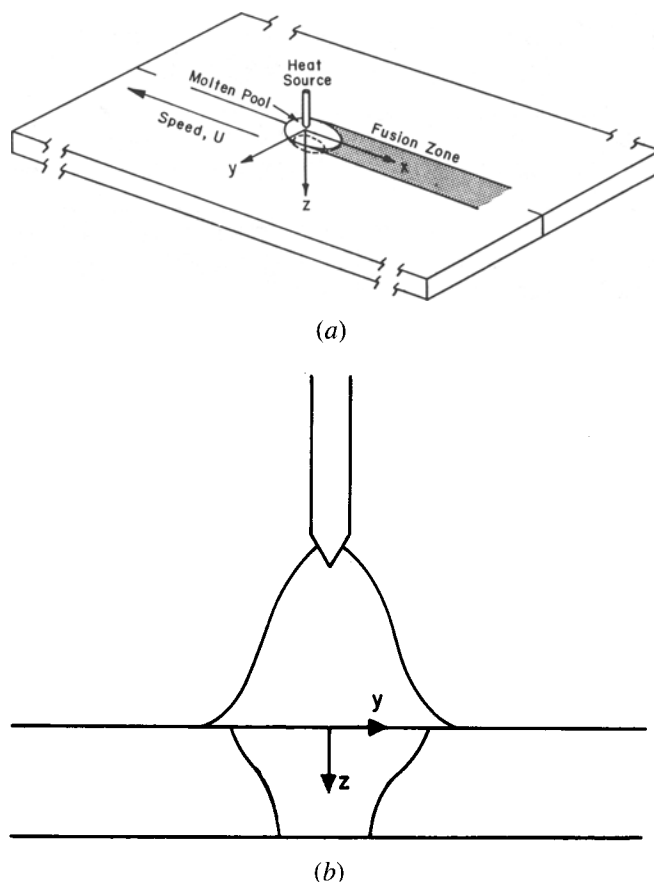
Schematic sketch of (a) the arc welding system, and (b) front view of the arc and the weld pool.
